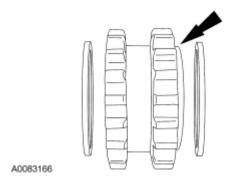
Locating Washers, Oil Pump Chain & Sprockets Courtesy of FORD MOTOR CO.
